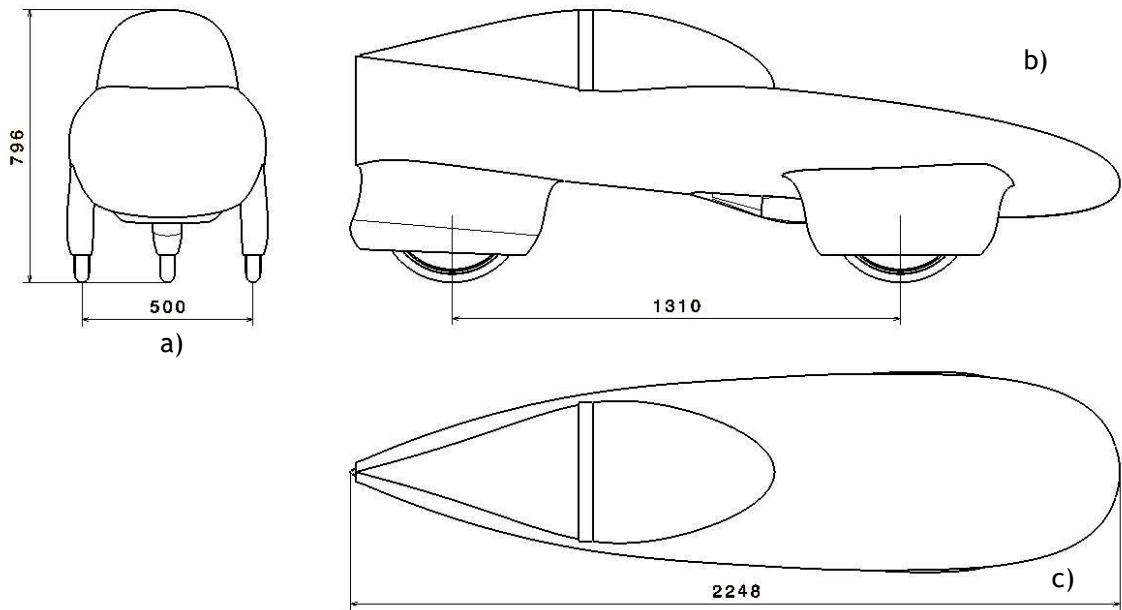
3 Views of first design of the vehicle configuration concept. Dimensions in [mm] a) Front View b) Side View c) Top View
